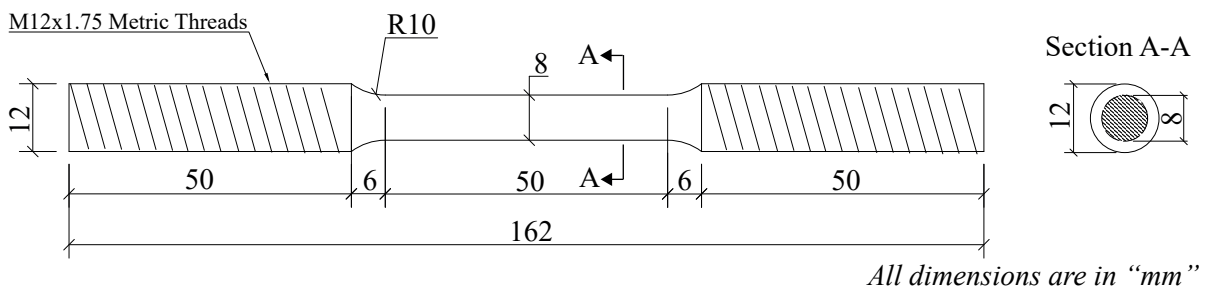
Technical drawing of round steel coupons / SMIBC-E0/E1 test campaigns.
